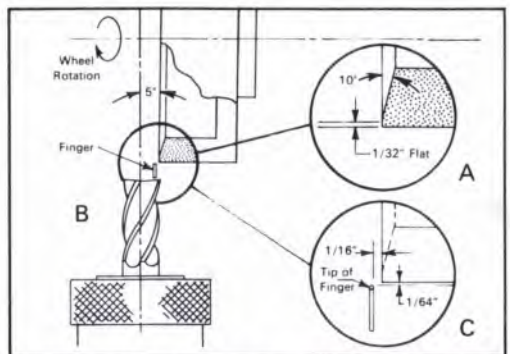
End Mill, Finger, Grinding Wheel Relationship
